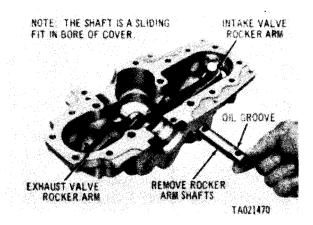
Removing valve rocker arm shafts and ualve rocker arms.
